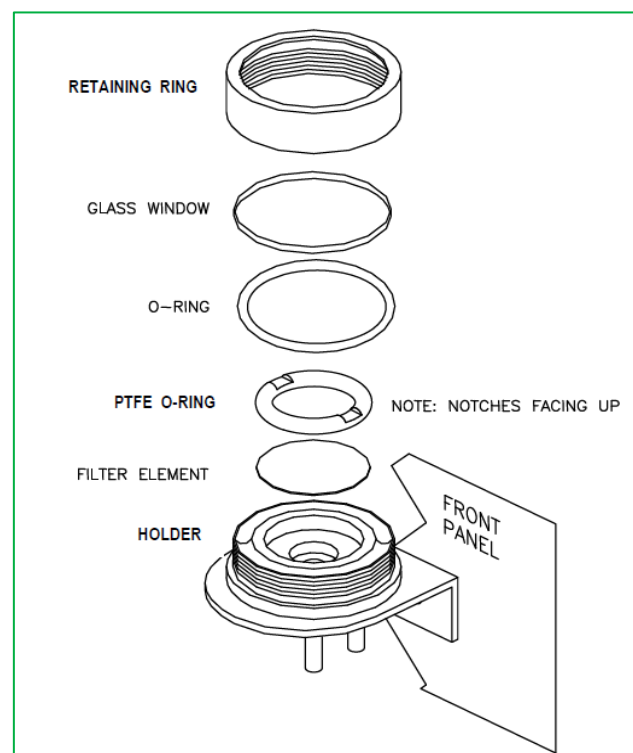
Diagram of API filter housing components. ©Teledyne API
